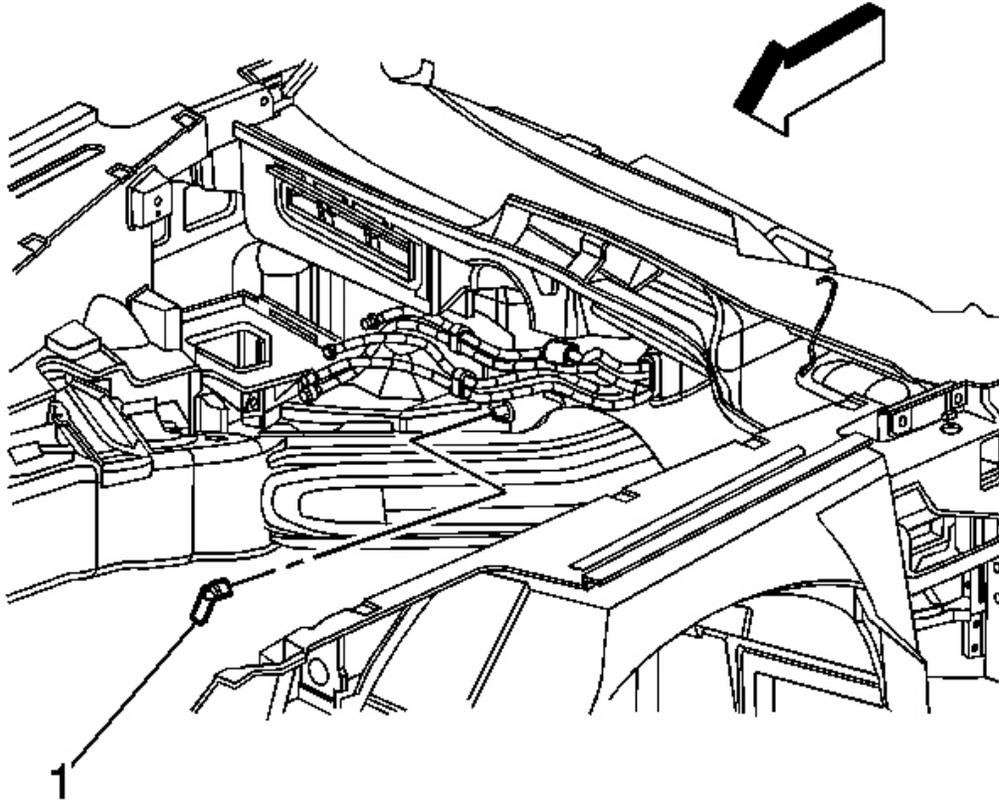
Identifying Evaporator Drain Tube At HVAC Module
